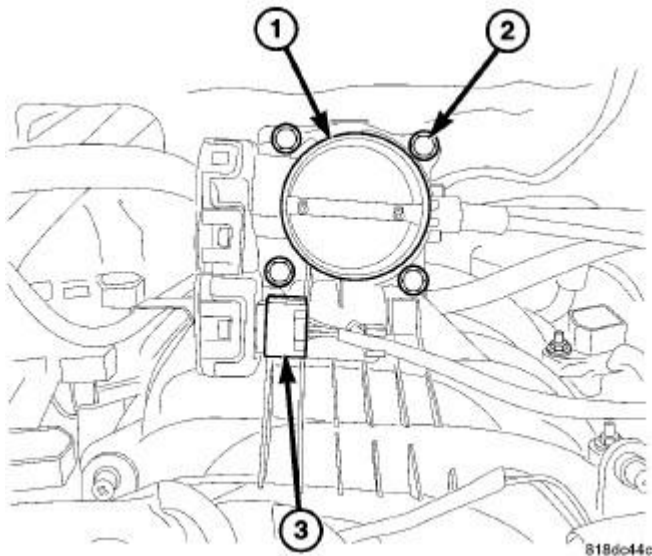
Throttle Body 3.7L, Mounting Bolts & Connector
